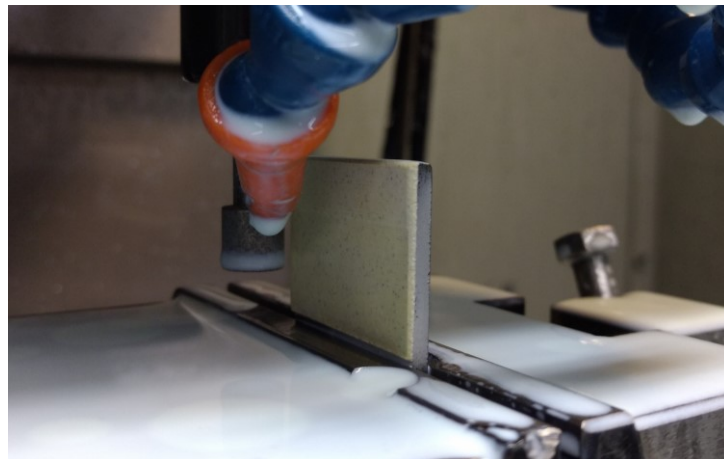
Coolant-fed diamond grinding setup for TBC specimens
